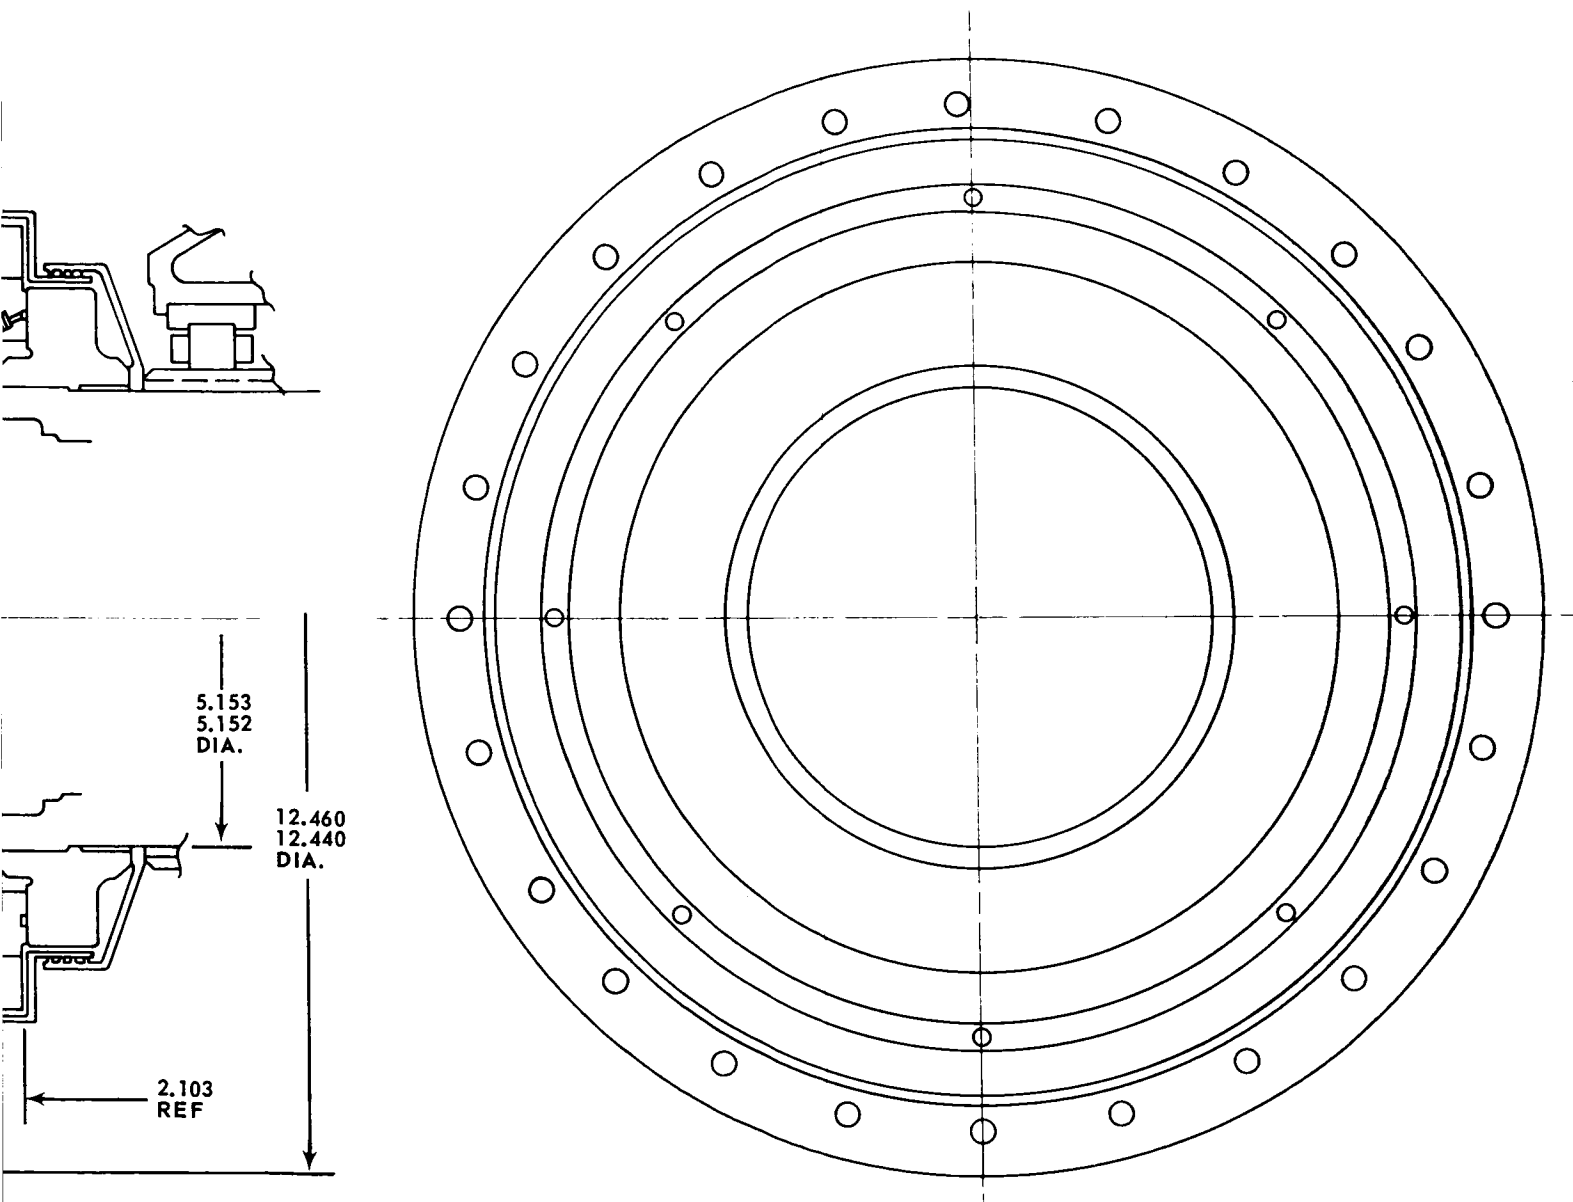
Film Riding Face Seal Assembly - Orifice Compensated Type With
